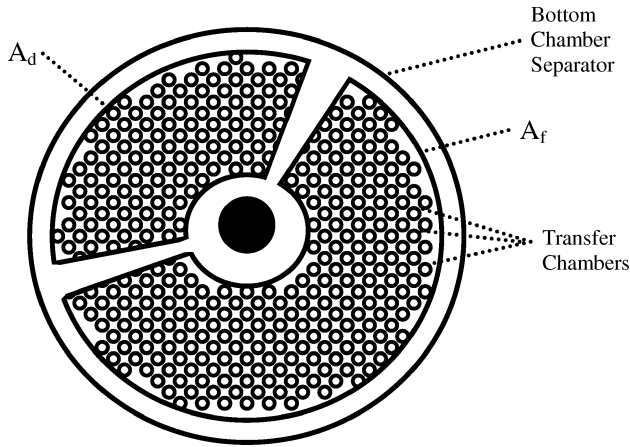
Bottom view of bottom chamber separator, showing spindle through propellant entrance and exit holes.
